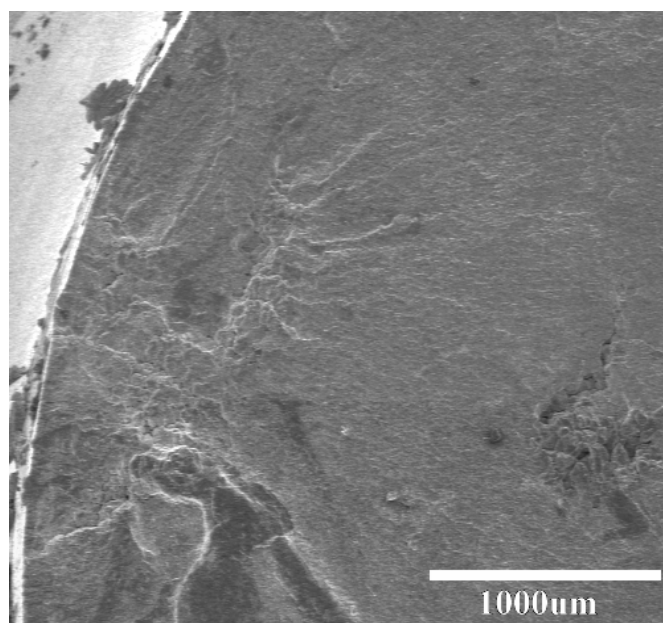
View of the Crack Initiation Site of a Cylinder with Disc Specimen Fracture Surface, $S_a = 392$ MPa (Specimen E5)
